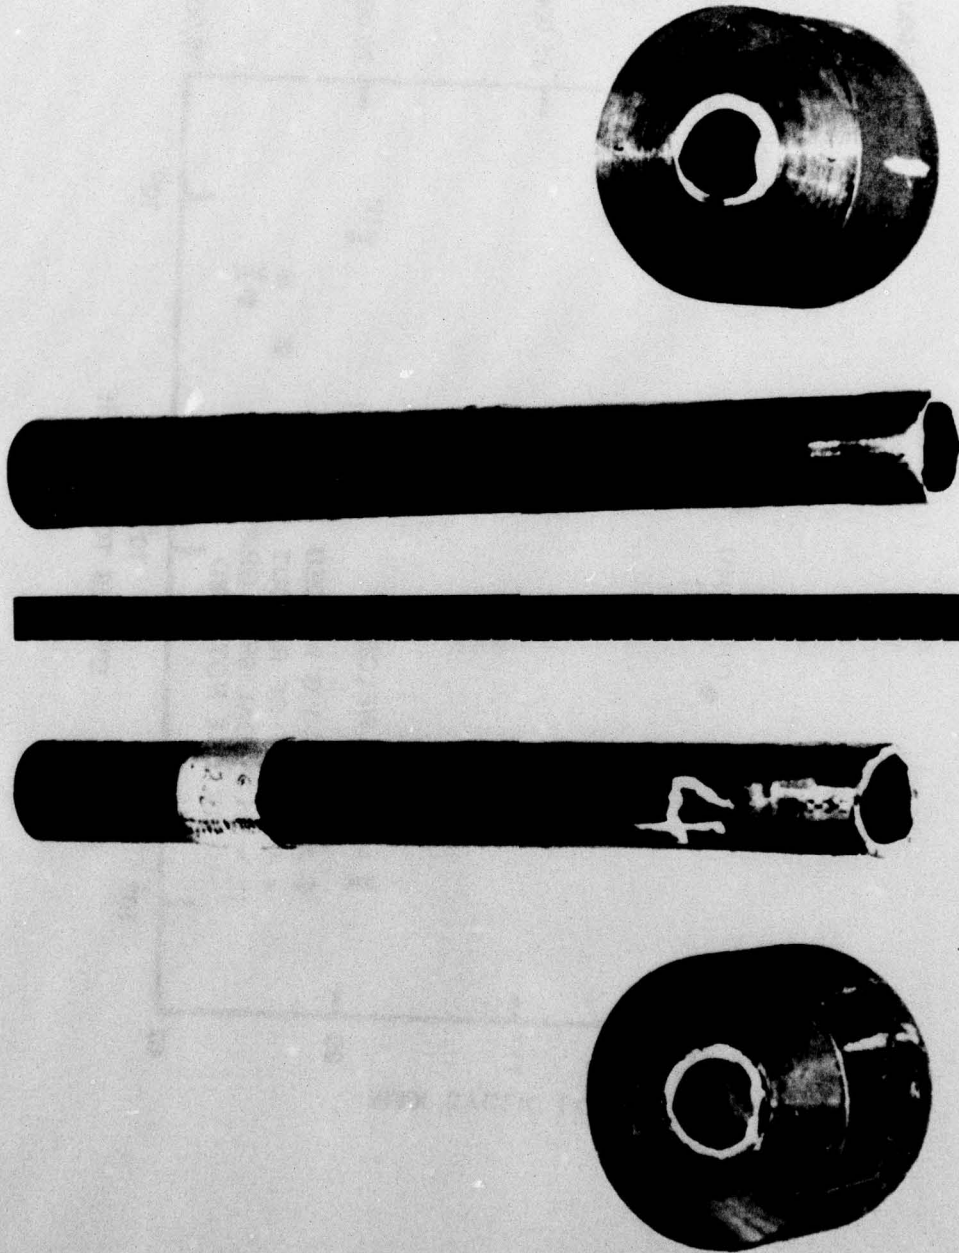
Weld (Specimens J and 6) and Tube
